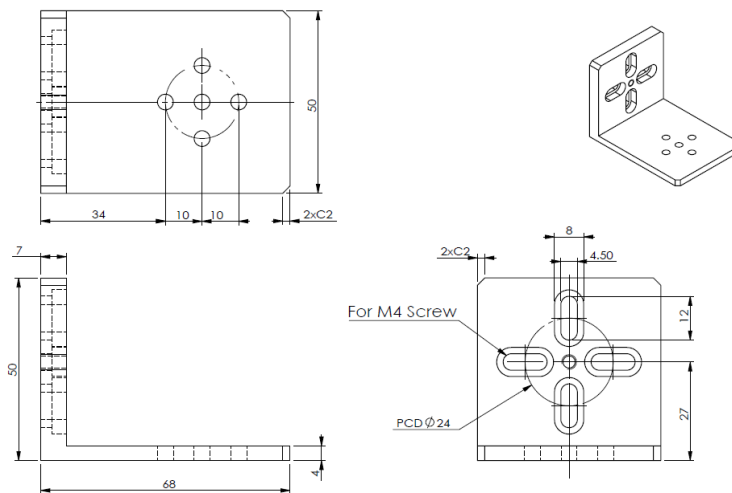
Mechanical drawing of bottom plate and L-adaptor board (Unit : mm)
